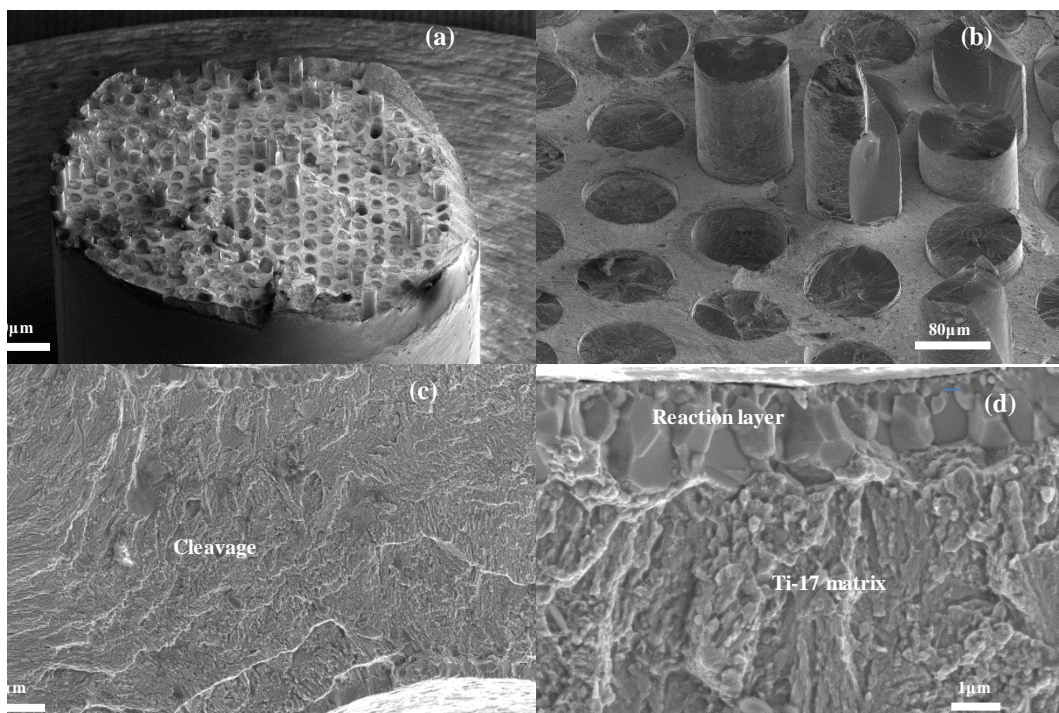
Fracture morphologies of the fracture surface of the sample 1 at RT (The secondary electron images)
